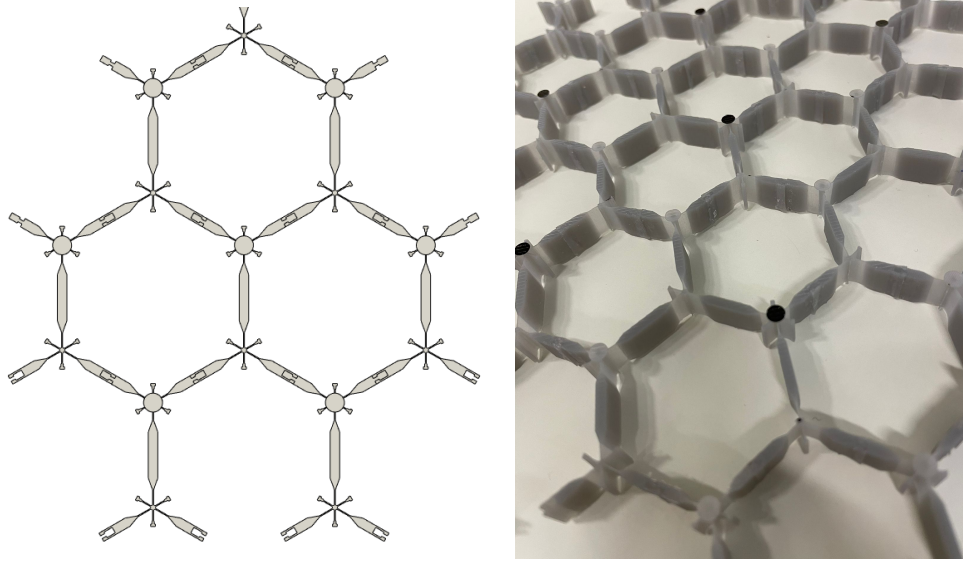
The final passive unit cell: Left a top view of the CAD design and right the produced version.
